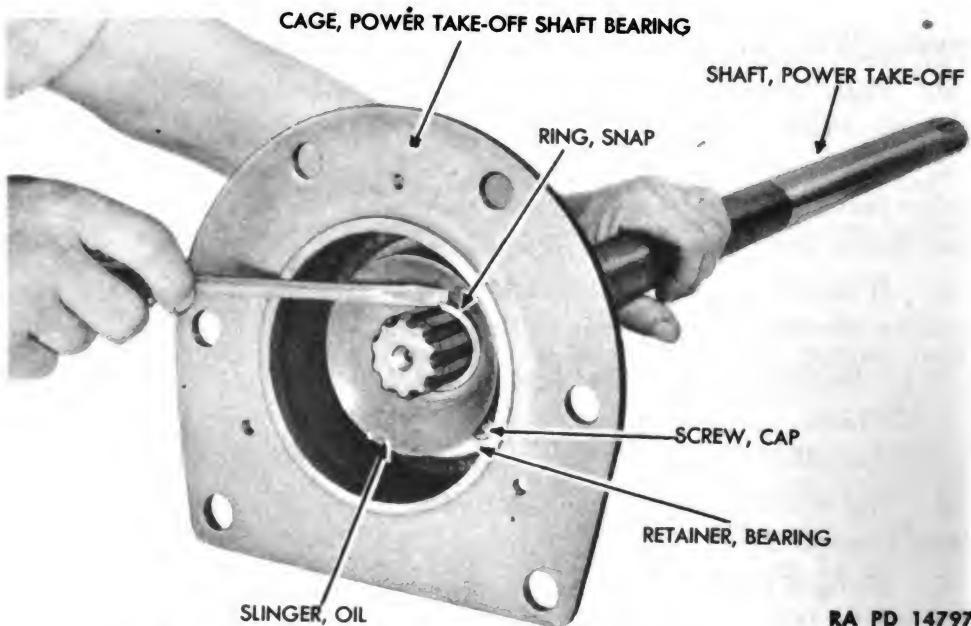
Power Take-Off Shaft Bearing Cage Removal
